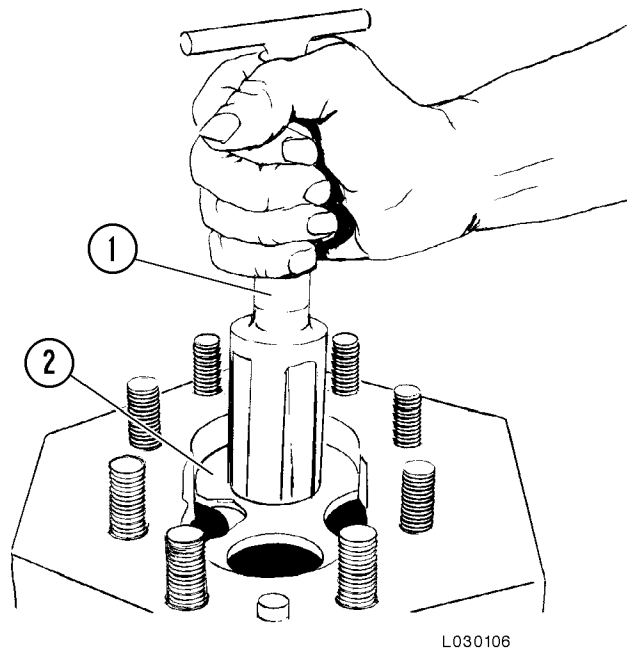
PRESSURE PLATE REMOVAL
